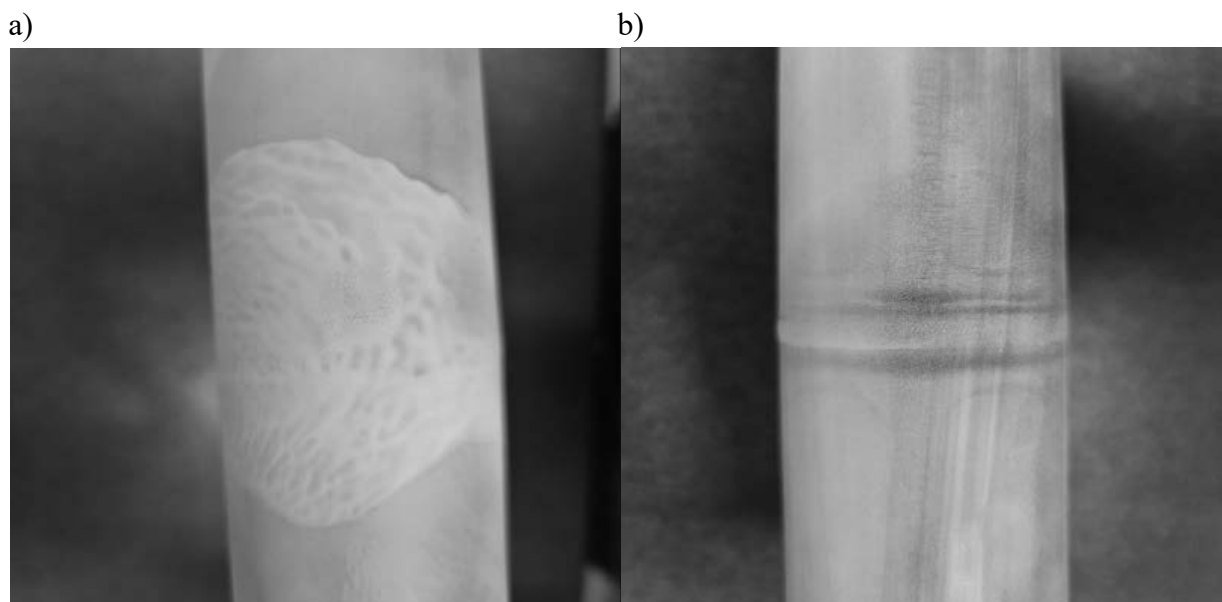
The butt joint of the sample obtained by TIG method of austenitic chromium-nickel stainless steel pipe grade 304 welded a) manually, b) automatically.
